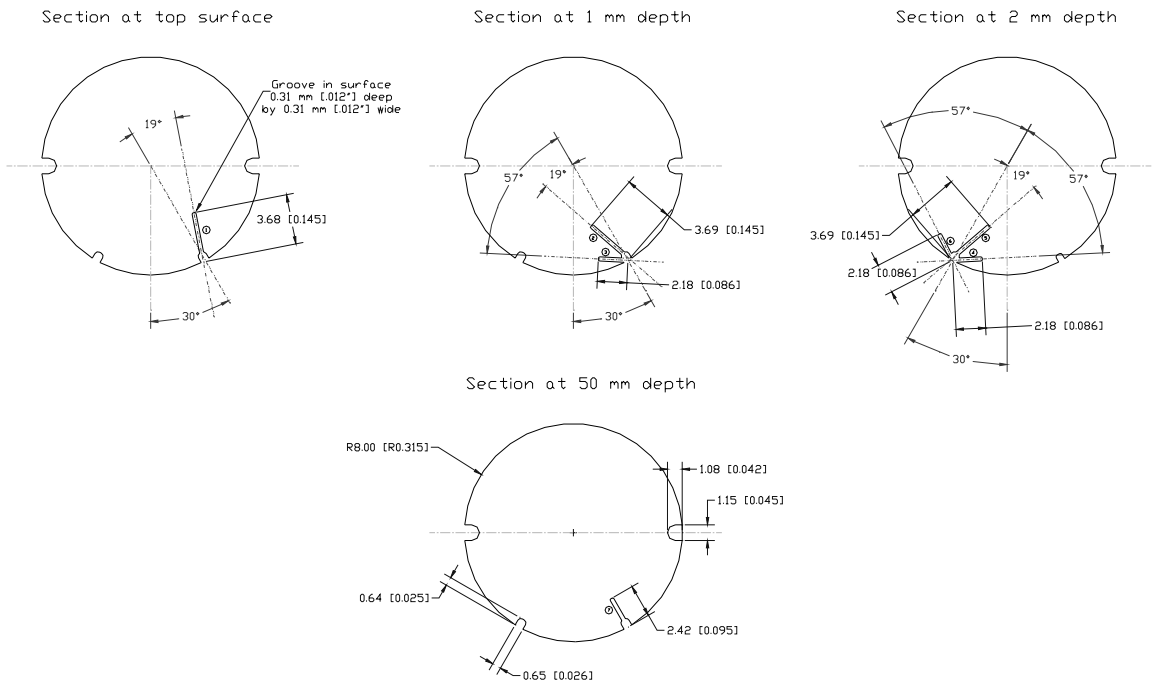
Groove locations in the glass wafers for thermocouple placement (dimensions in mm).
